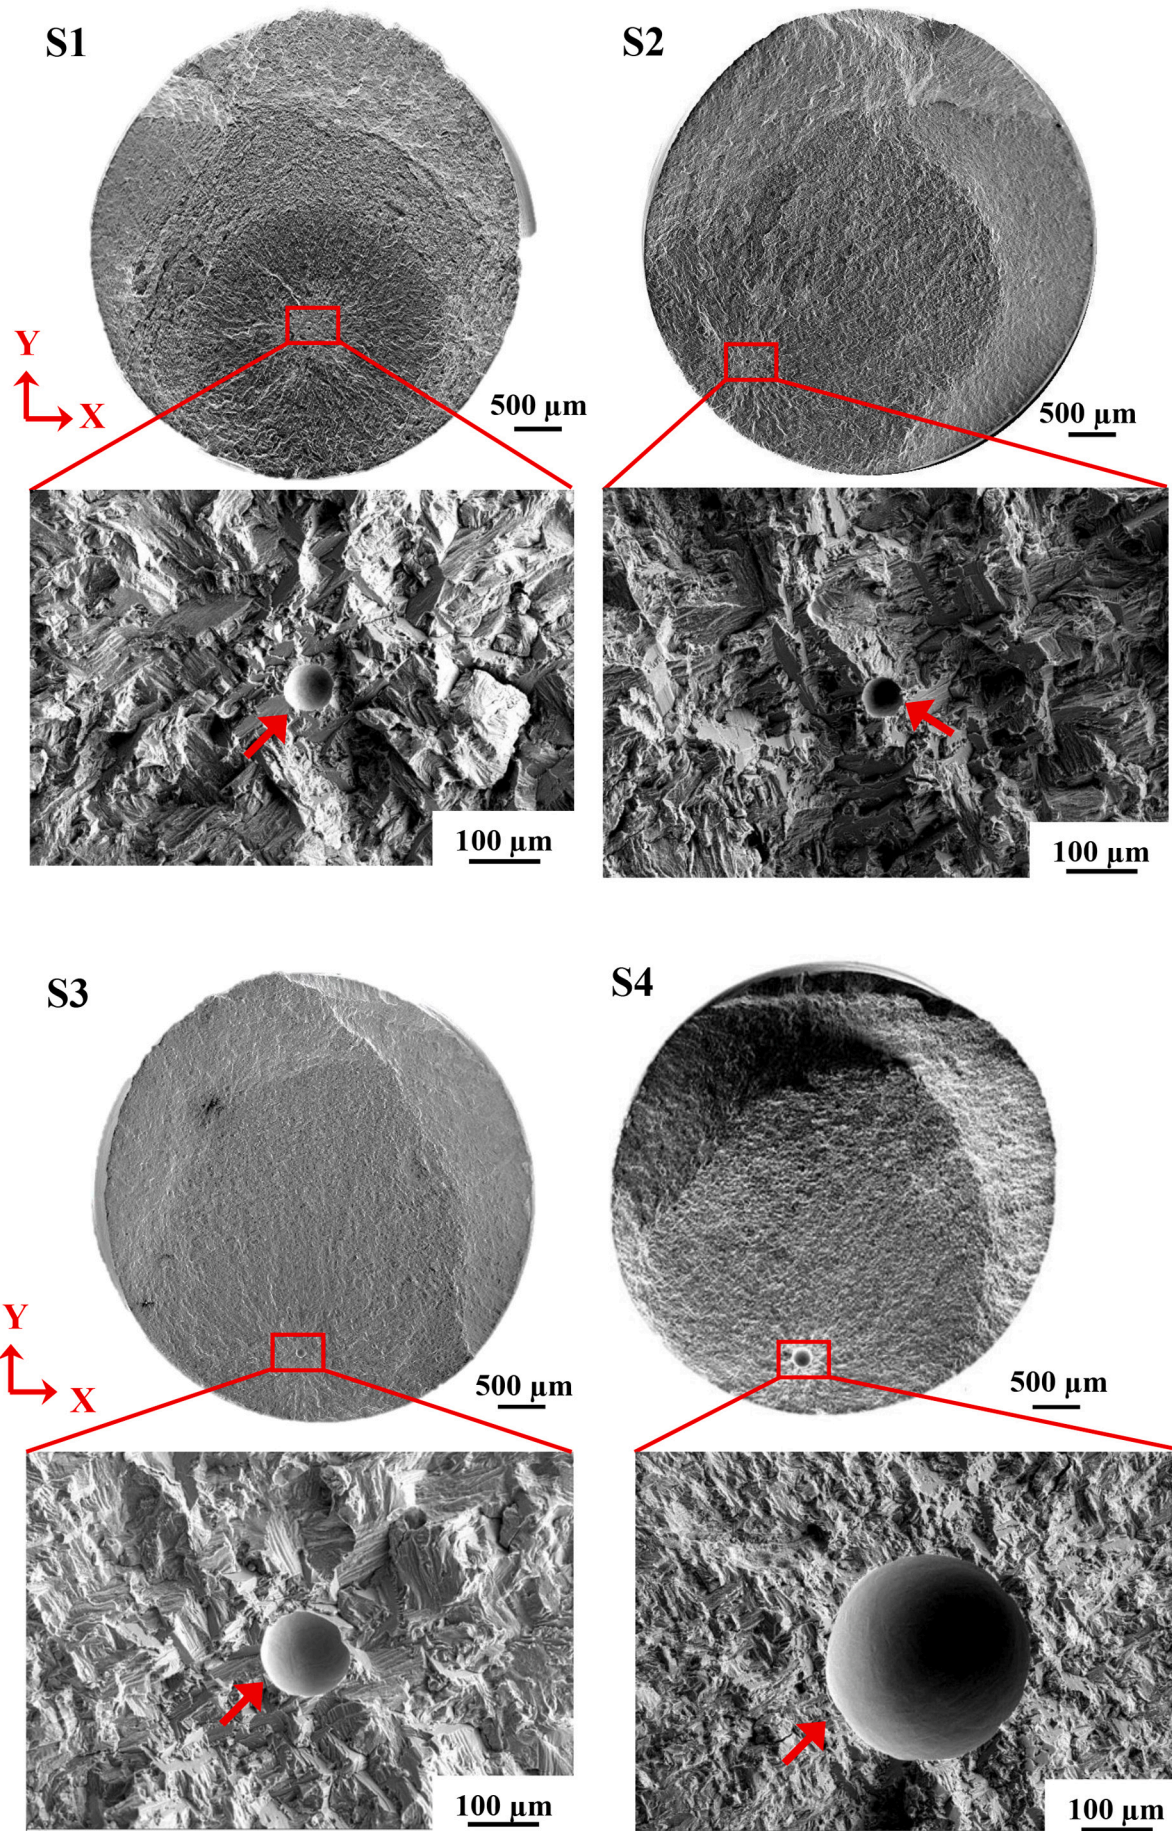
SEM images of fracture surfaces showing the embedded defect for the 700 MPa sample group. The crack initiating defect is indicated with an arrow.
